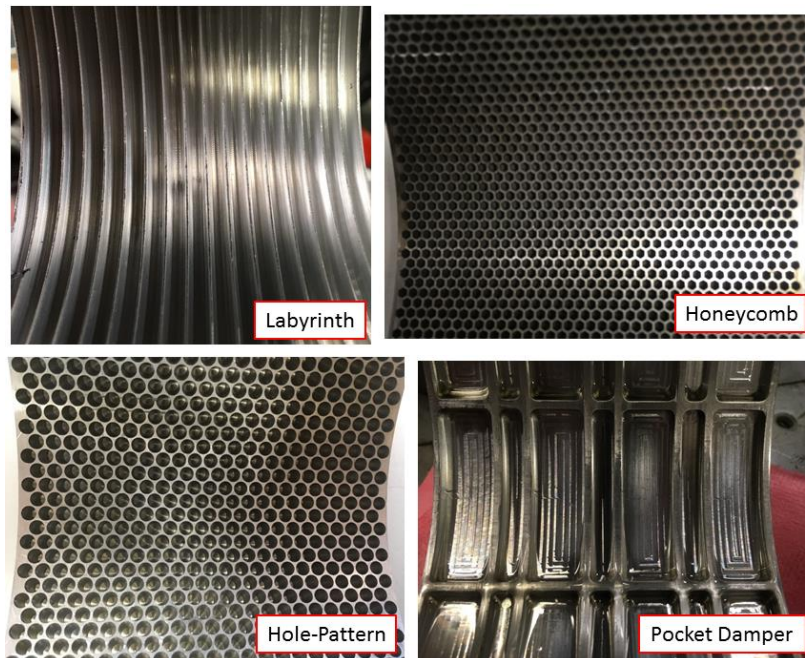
Close-up photographs of a labyrinth seal, a honeycomb seal, a hole-pattern seal, and fully-partitioned pocket damper seal.
